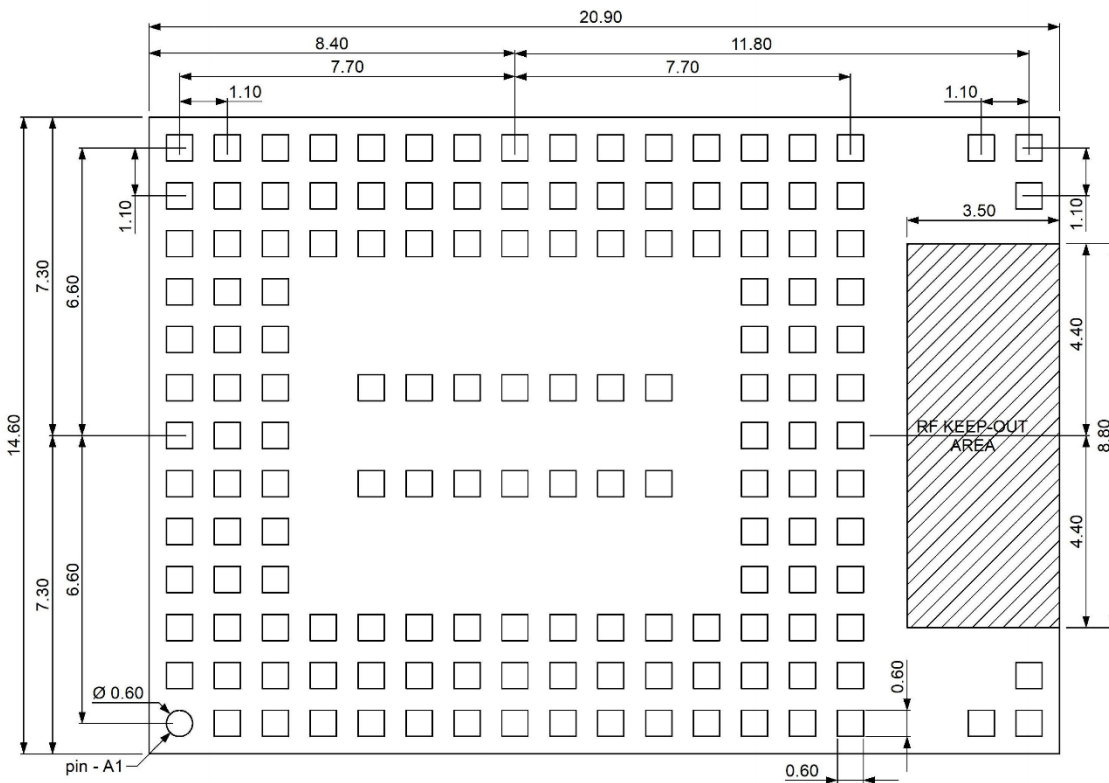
IRIS-W106 recommended PCB footprint (top view)
